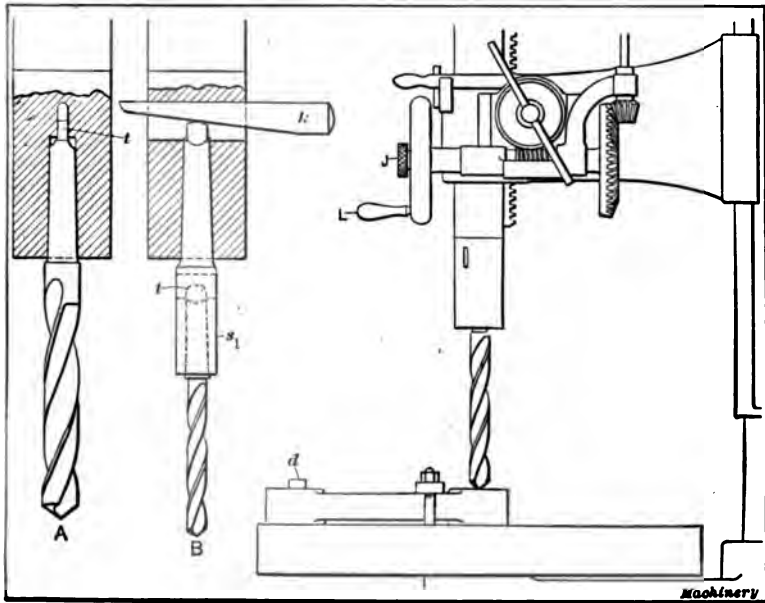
Method of Holding and Driving Taper-shank Drills.
